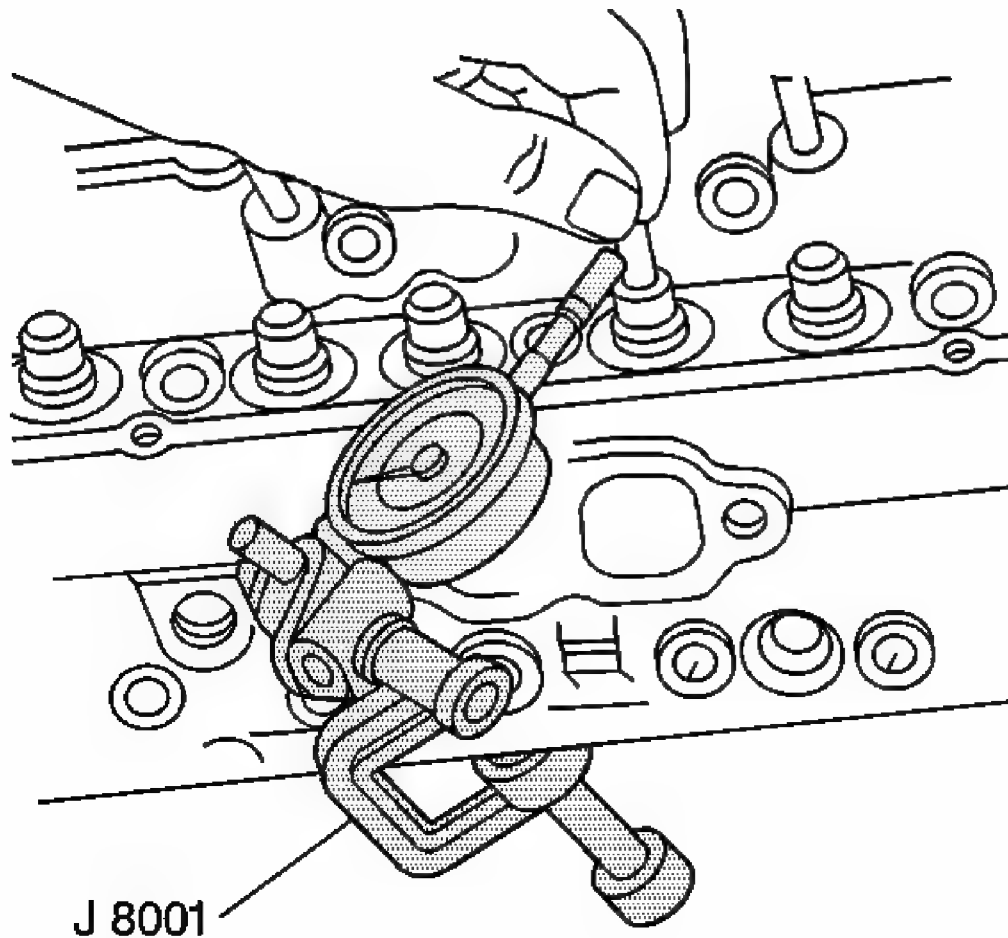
Measuring Valve Stem-To-Guide Clearance
